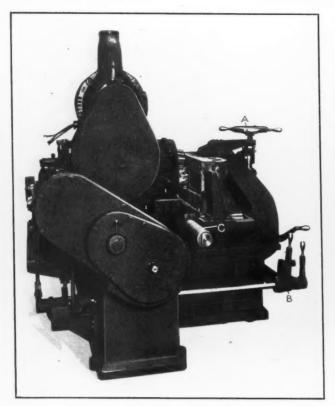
Milling the Valve Cover Seat and the Manifold Pads on One Side of the Cylinder Block
